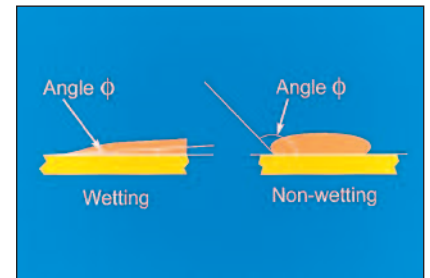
Sketch to show wetting and non-wetting. Wetting occurs when the contact angle ϕ is less than 90°
